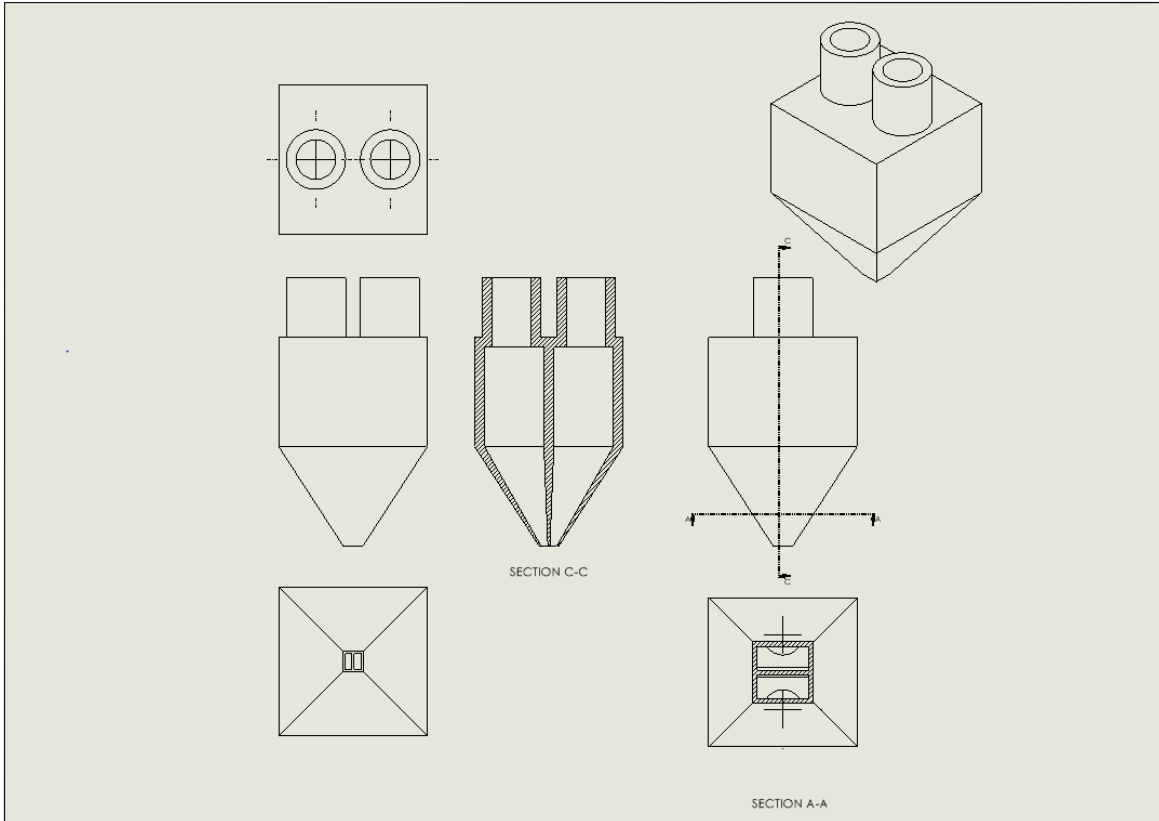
Drawing of the Square Two Material Nozzle Conceptual Design
